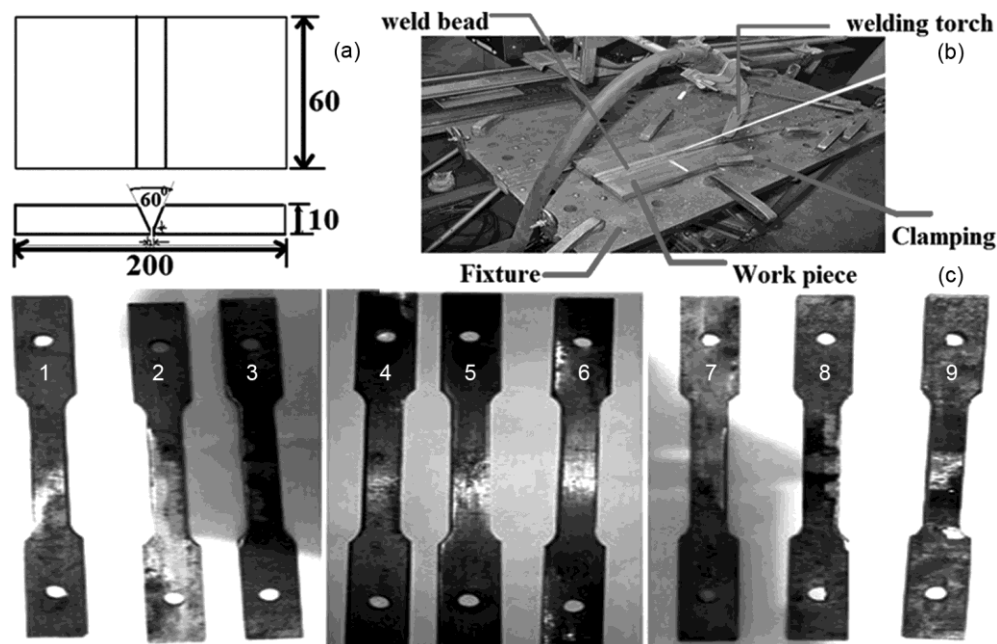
(a) V-groove detail of sample (all dimensions in mm), (b) actual welding setup, and (c) tensile test samples.
